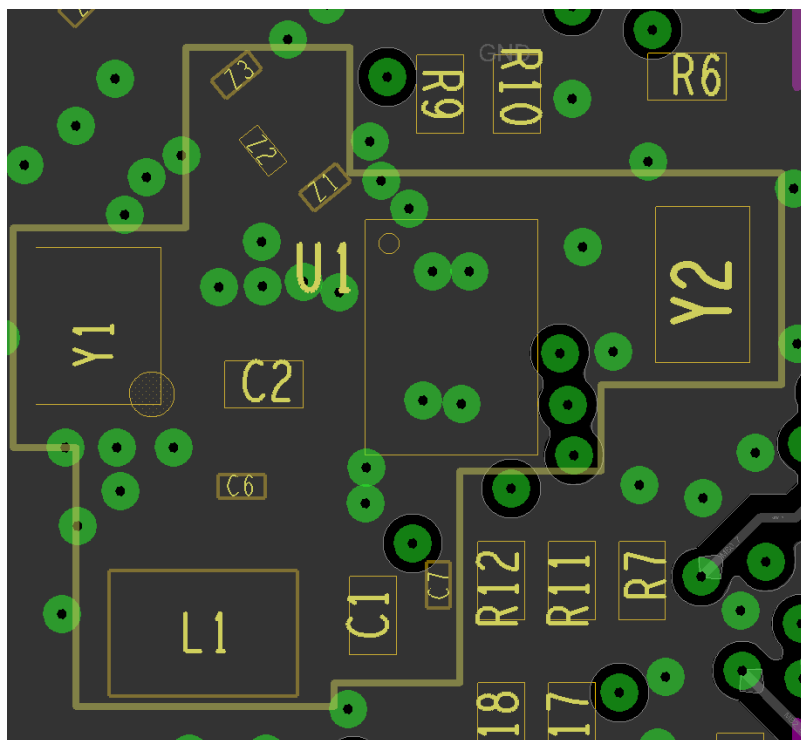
FCGQFN24 PCB Placement and Routing – GND Bottom Layer
